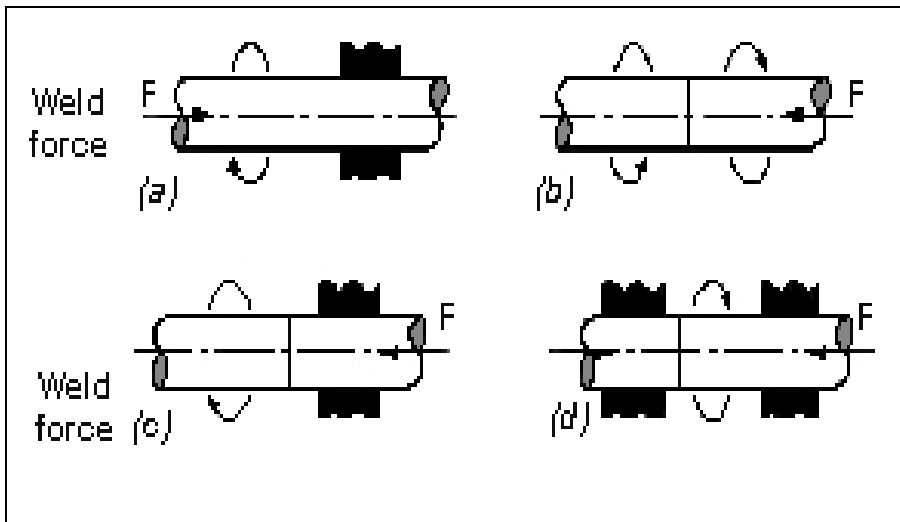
Possible configurations for spin welding thermoplastics
